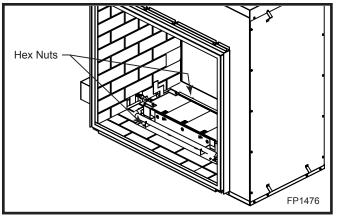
Use a 3/8" socket to remove hex nuts holding burner legs.
